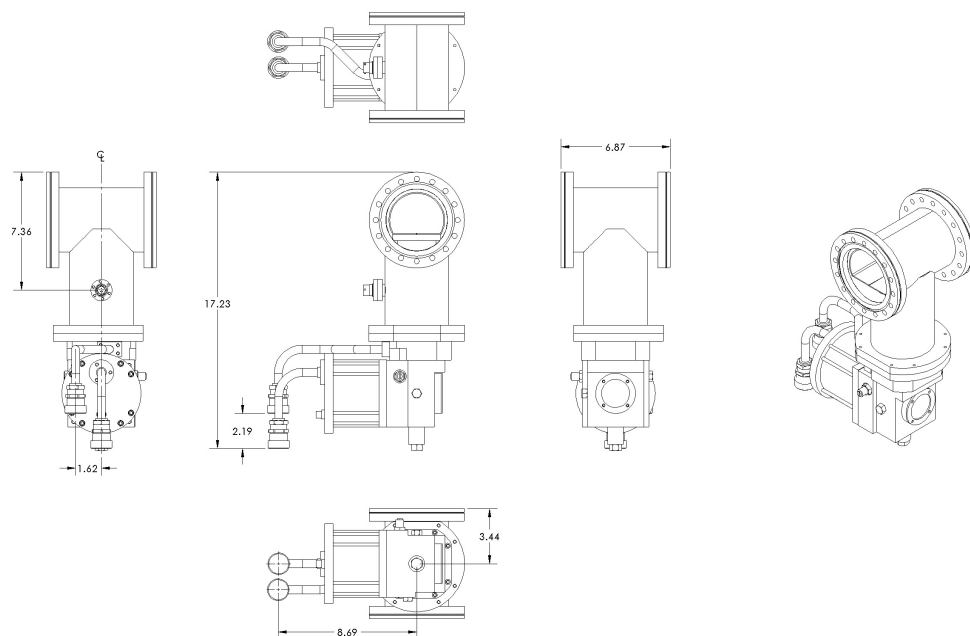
Dimensional Drawing of a 4" In-Line Cryogenic Water Pump with Rotatable CF Inlet Flanges, both Standard and UHV versions
